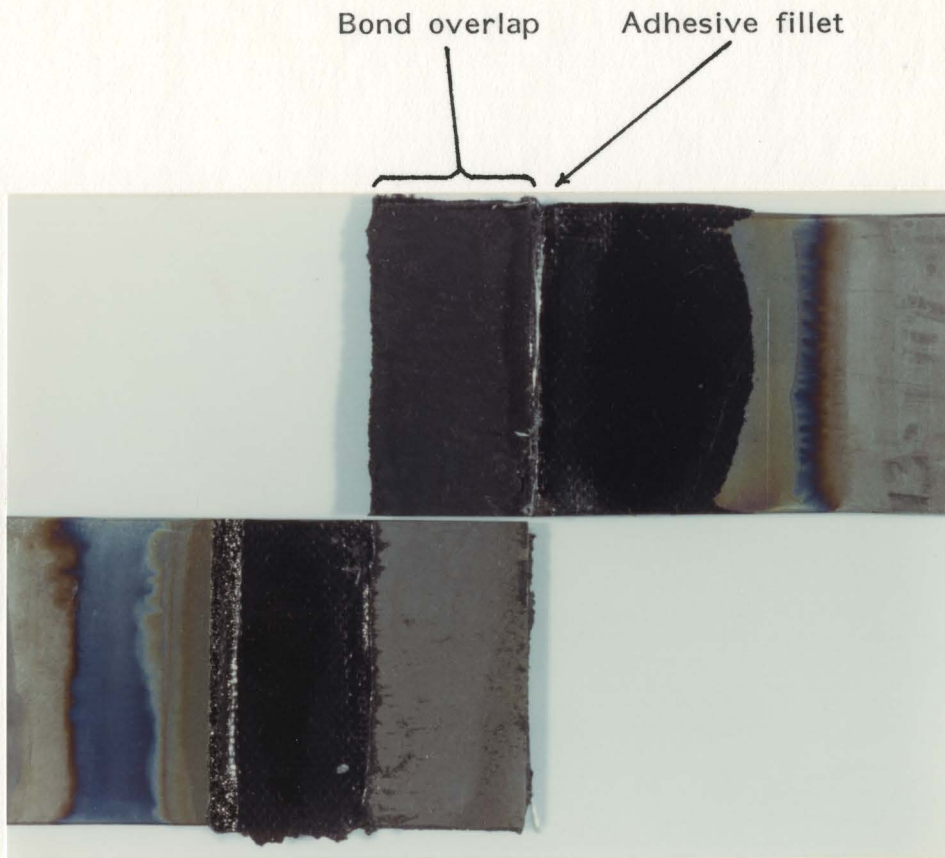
Photograph of a Fracture Surface for a Single Lap Bond Illustrating Apparent Failure IV.
